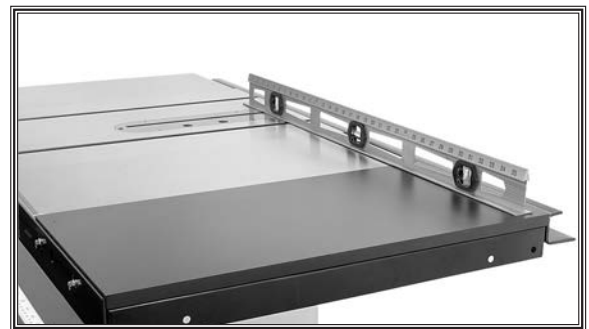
Adjusting Model W1819 extension table flush with wing and table.
